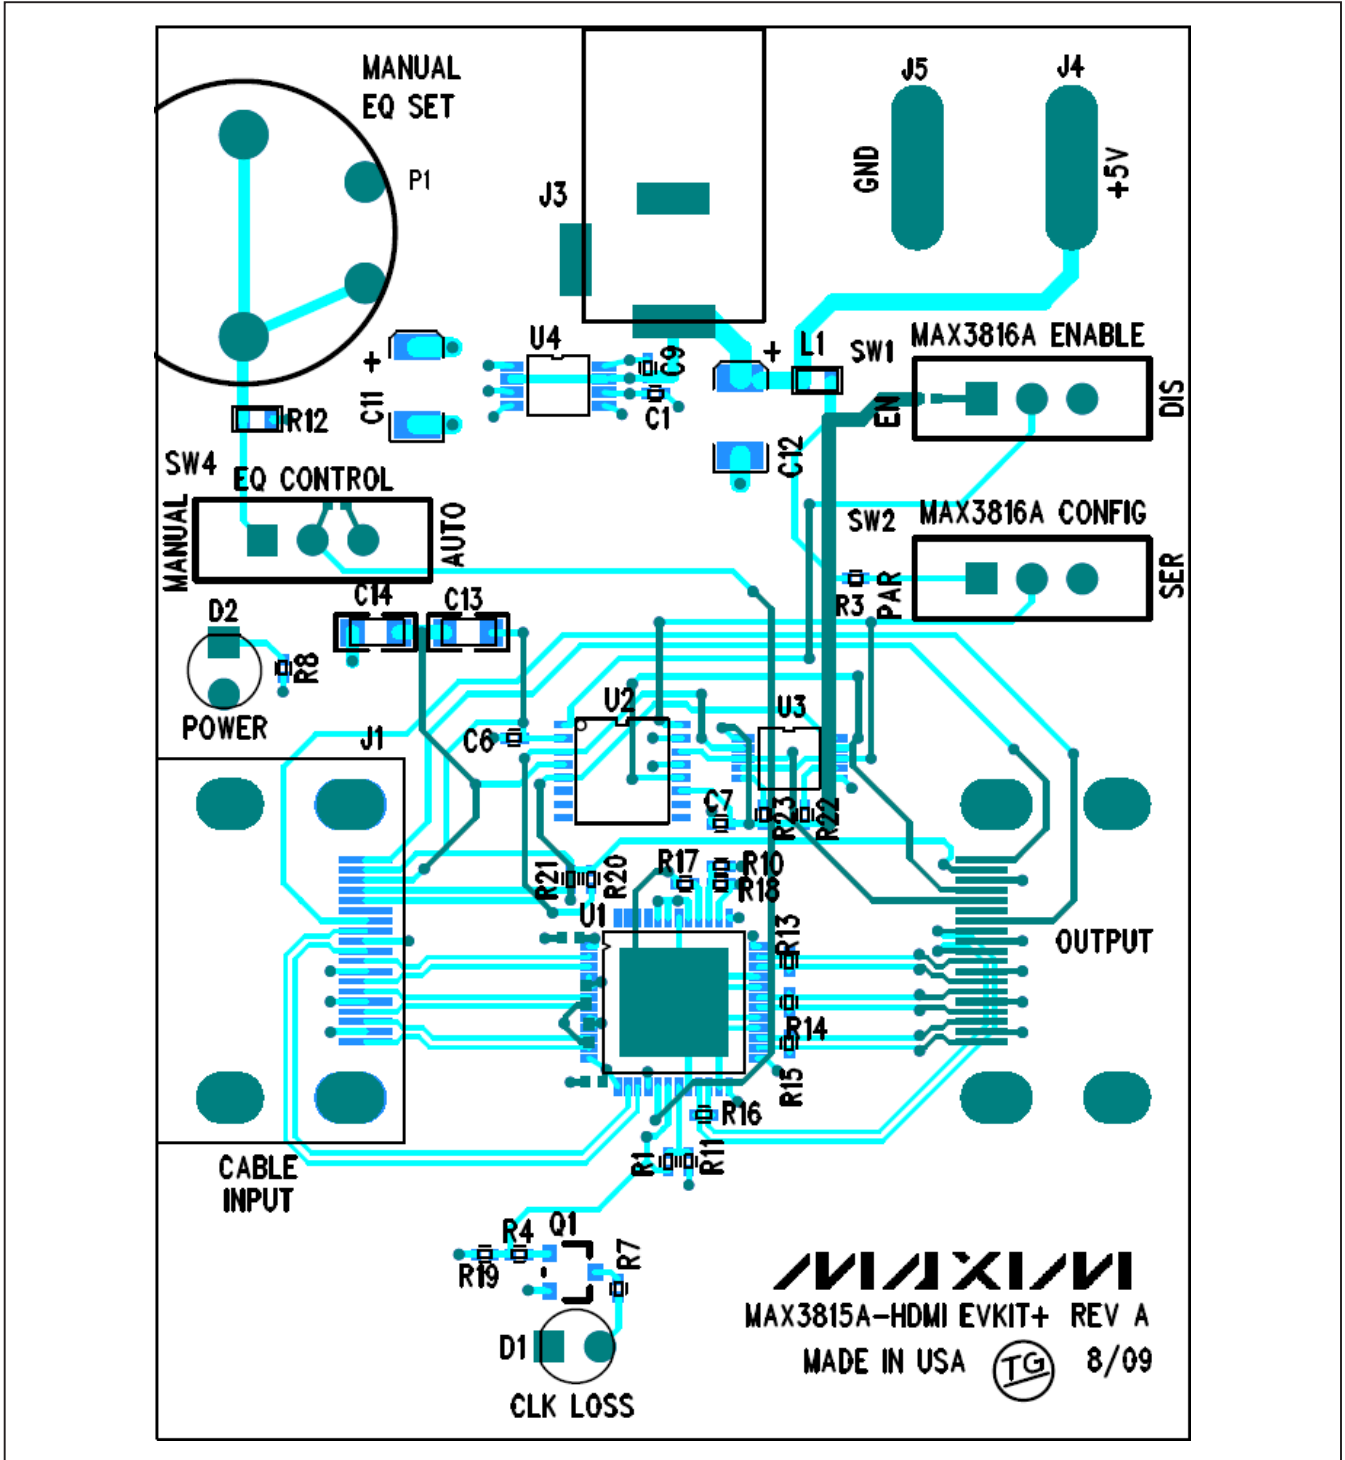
MAX3815A EV Kit Component Placement Guide—Component Side
